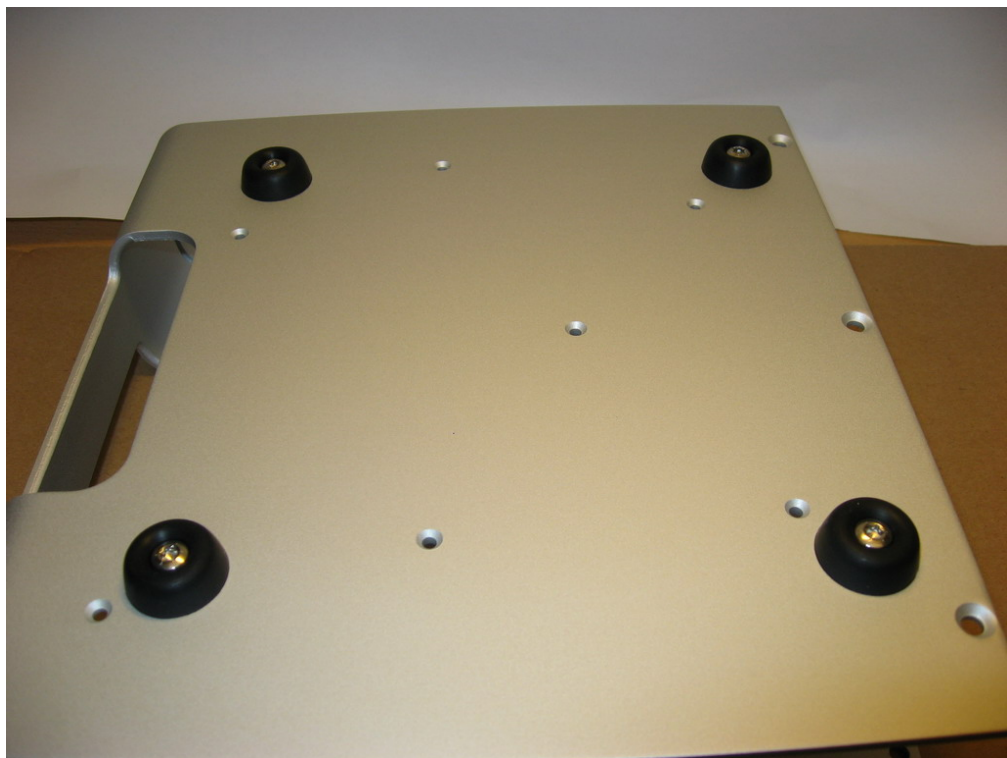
Mount the rubber feet's using the four screws as shown in the picture.
